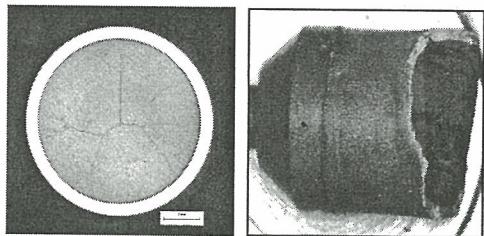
Macroscopic inspection for PWR fuel sample and End plug sample.
